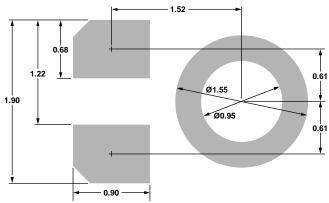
PCB Land Pattern Layout Dimensions shown in millimeters
